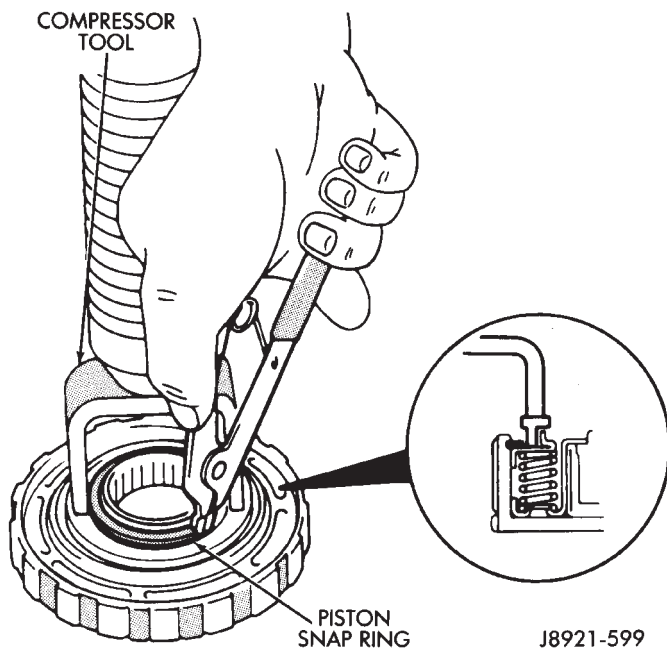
Removing/Installing Second Brake Piston Snap Ring
